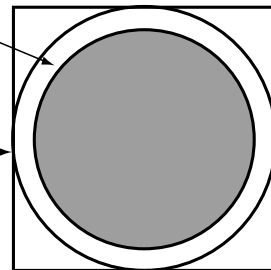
Footprint - 5 mils stencil - solder mask defined
